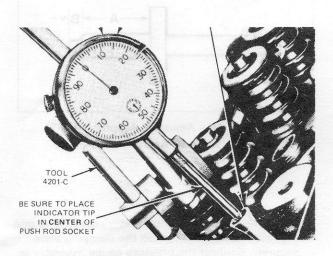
Testing Camshaft Lobe Lift - Typical
